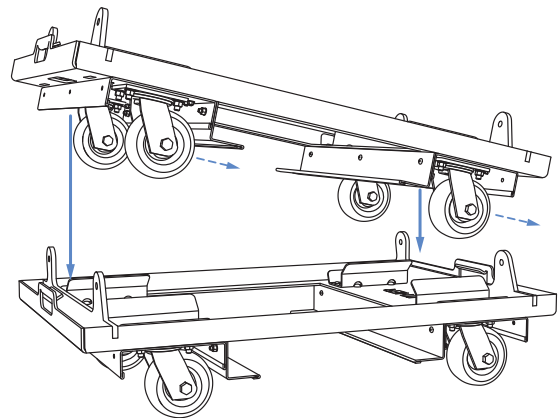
MCF-2100 Caster Frame Stacking, Tip to Rotate Casters, Lower to Stack
